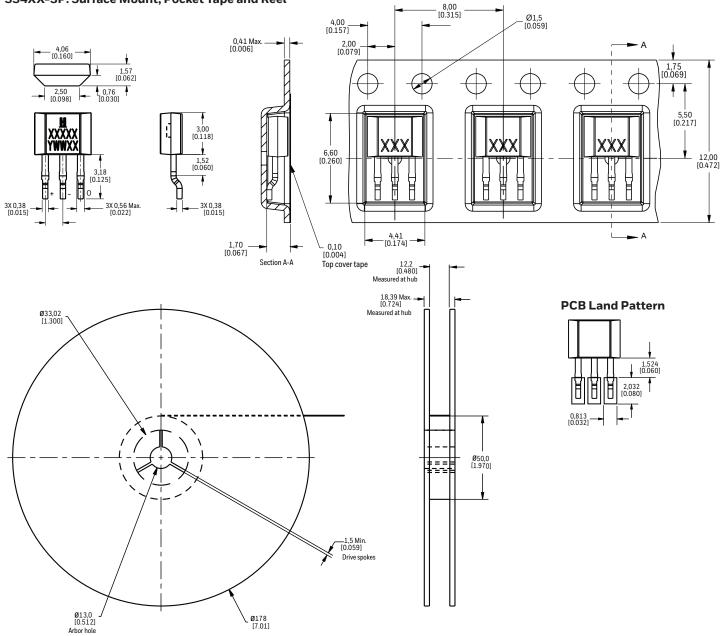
SS400 Series Flat TO-92-Style Mounting and Dimensional Drawings (continued)
